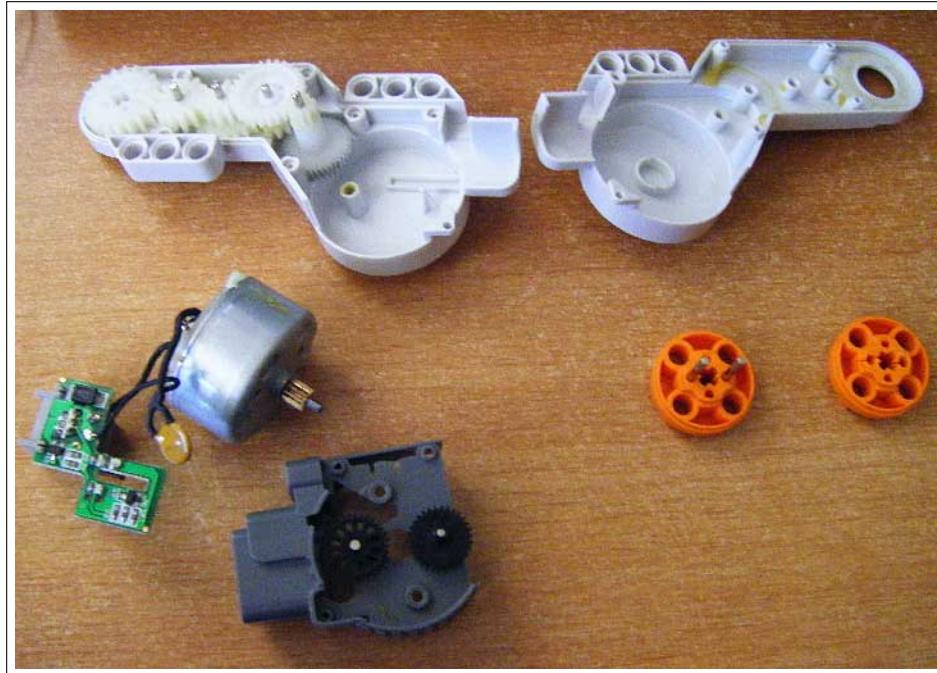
[Selection of Compatible HW & SW]: Lego NXT Motor (Exploded) [11]
